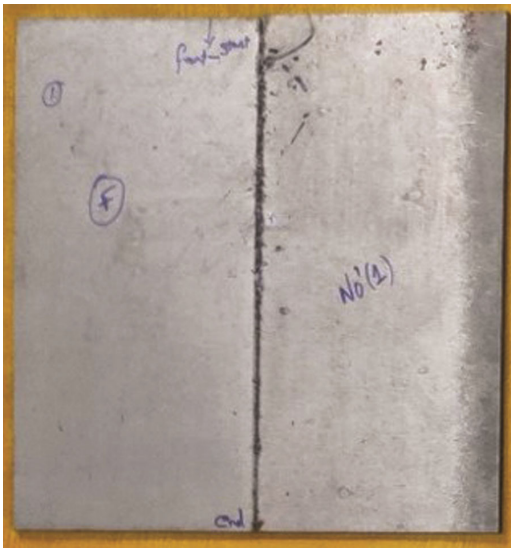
Laser welded AZ31B-Magnesium alloy sheets in Butt configuration.
